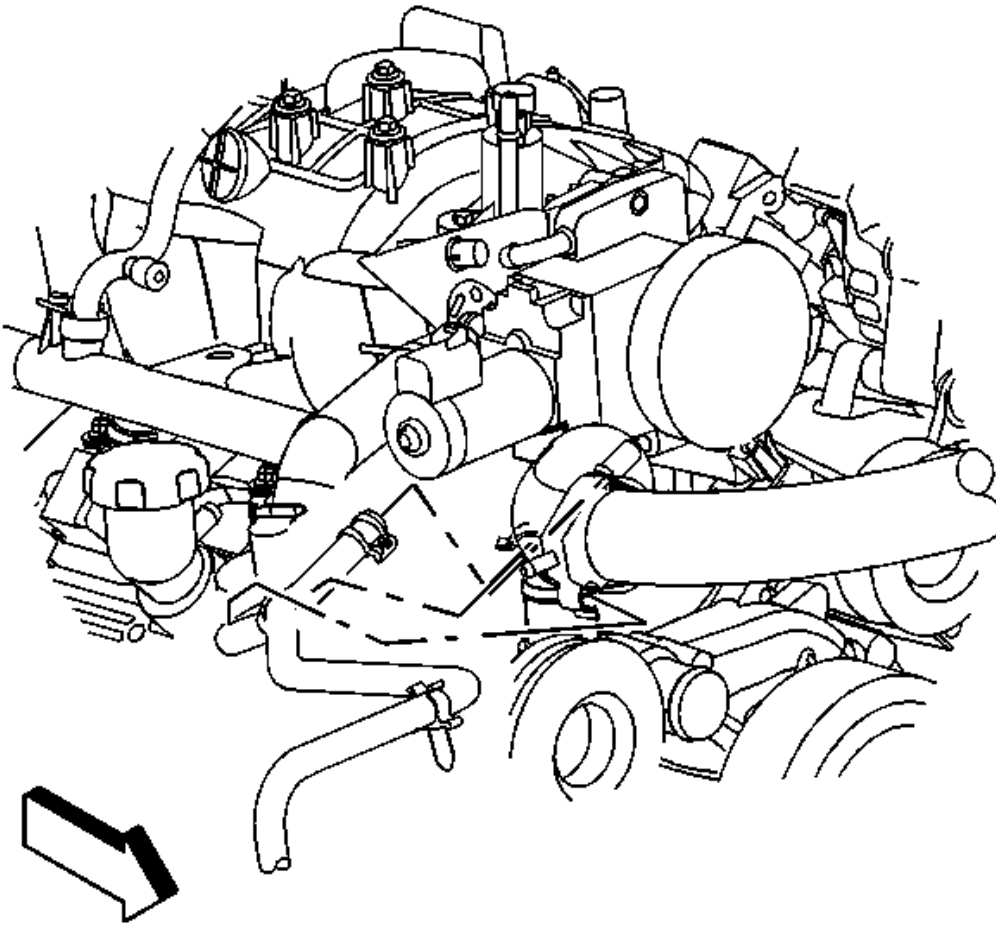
View Of Vent Inlet Hose At Throttle Body
